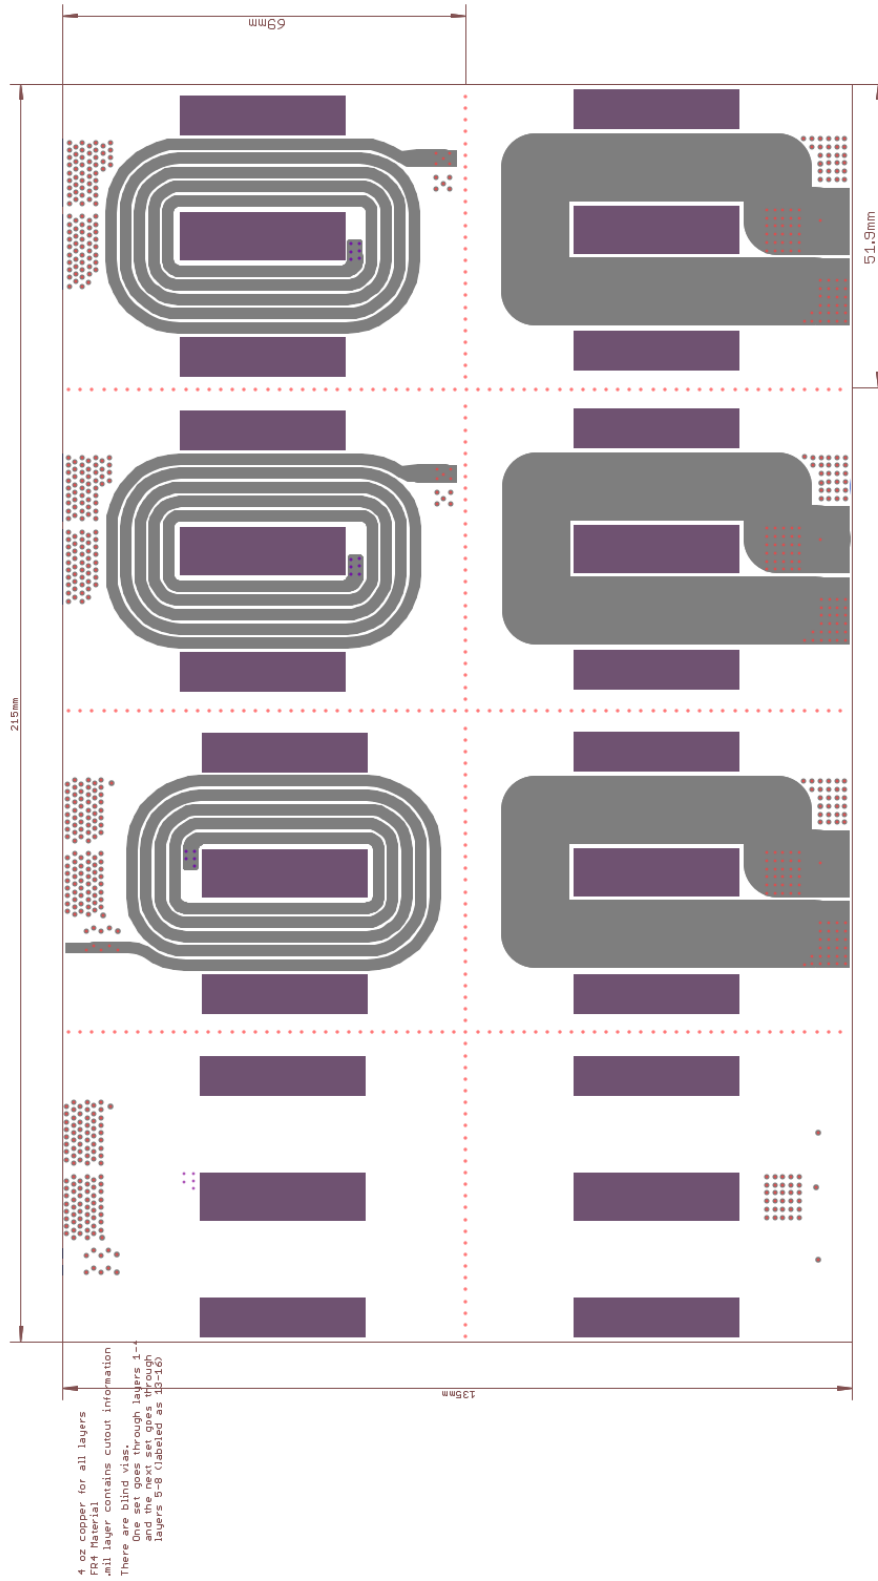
Layer 7 of the ICN transformer PCB winding (located in the top left) and other magnetic component variants. The purple rectangles indicate cutouts in the board.
